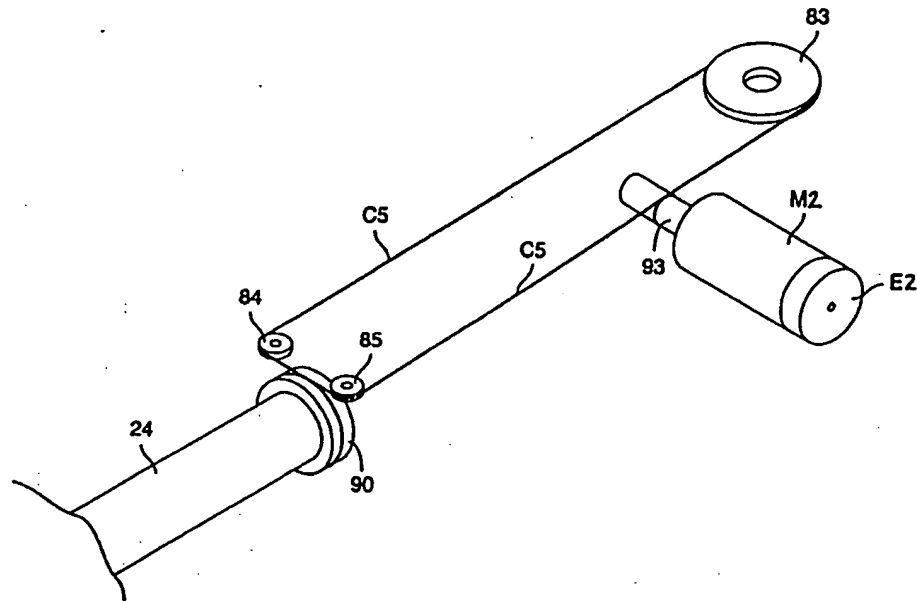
Rotation about the instrument shaft 24 is driven by motor M2 and a cable drive which acts in a similar fashion to a traditional spline.
